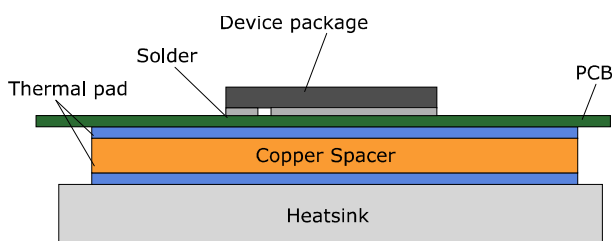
HEMT device package mounted on PCB and pushed to a heat sink with a copper spacer.
